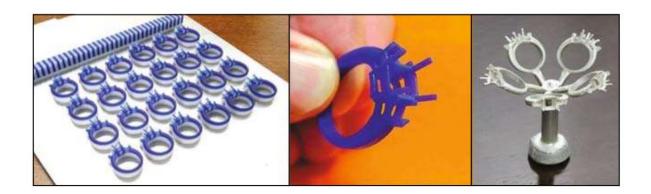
Rings for investment casting, made using a ProJet 1CPX 3D Printer
